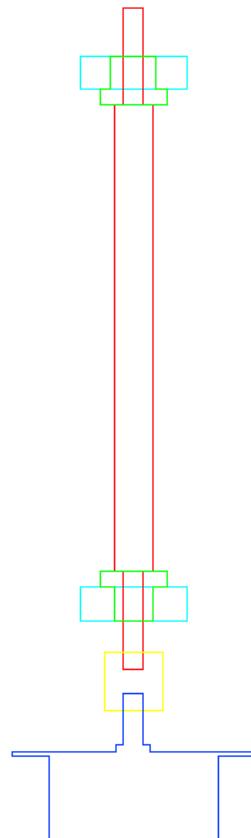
Two-dimensional drawing of the shaft/ motor system alignment
